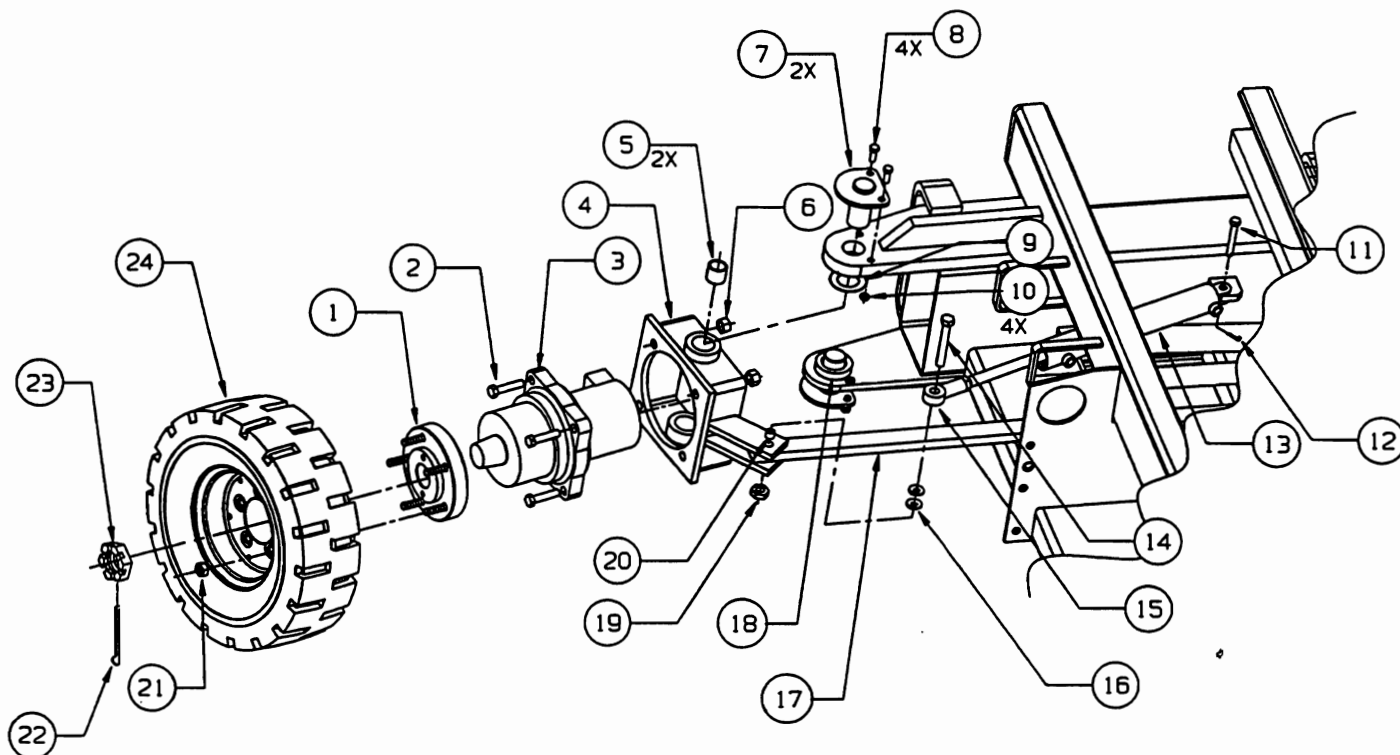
3068ES Pothole Protection System Assembly
